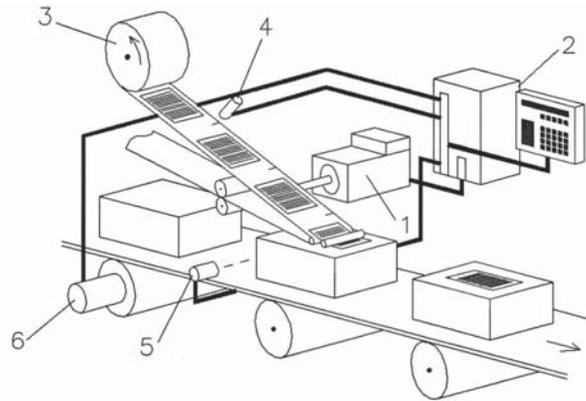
Automatic labelling systems with a PM brushless motor: 1 — PM brushless motor servo drive, 2 — controller, 3 — spool of self-adhesive labels, 4 — registration mark sensor, 5 — box position sensor, 6 — conveyor speed encoder. Courtesy of *Parker Hannifin Corporation*, Rohnert Park, CA, U.S.A.
